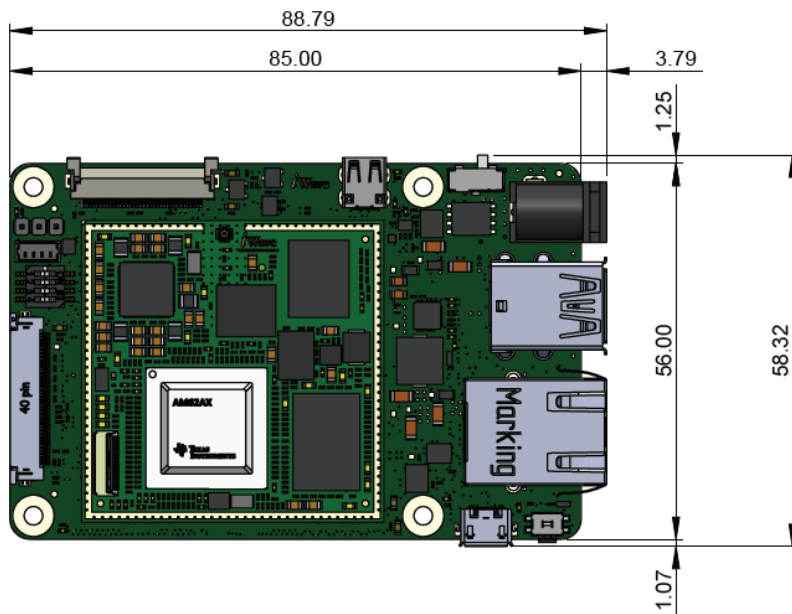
AM62Ax Compact SBC Mechanical Dimensions Top View
